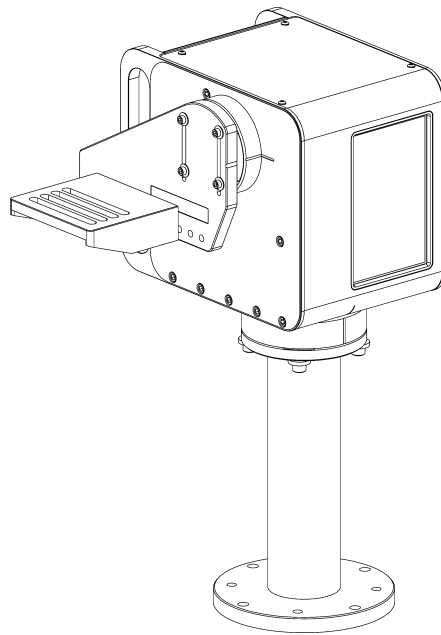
X350 Pan & Tilt Head, Mounted on a PM8 Pedestal Riser (front angled view)
